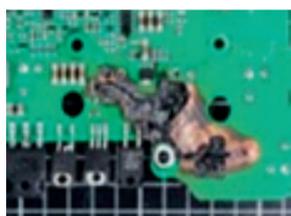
Photograph of an assembled board with a fire-damaged area in the lower right
